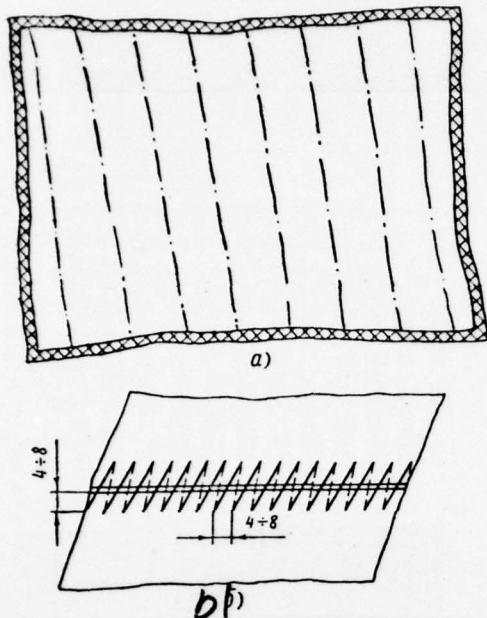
Sound-absorbing panel. a) the weld of overlock, b) weld in the sites of joint.
